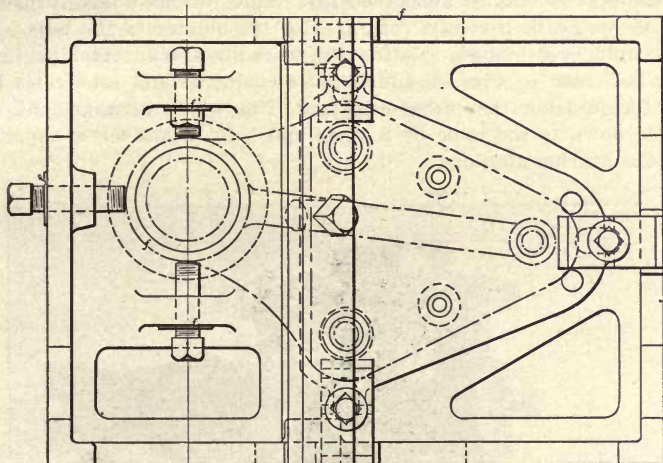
Simple Form of Plate Jig for Drilling Bracket shown in Fig. 97, after Hole *E* has been bored in the Lathe
